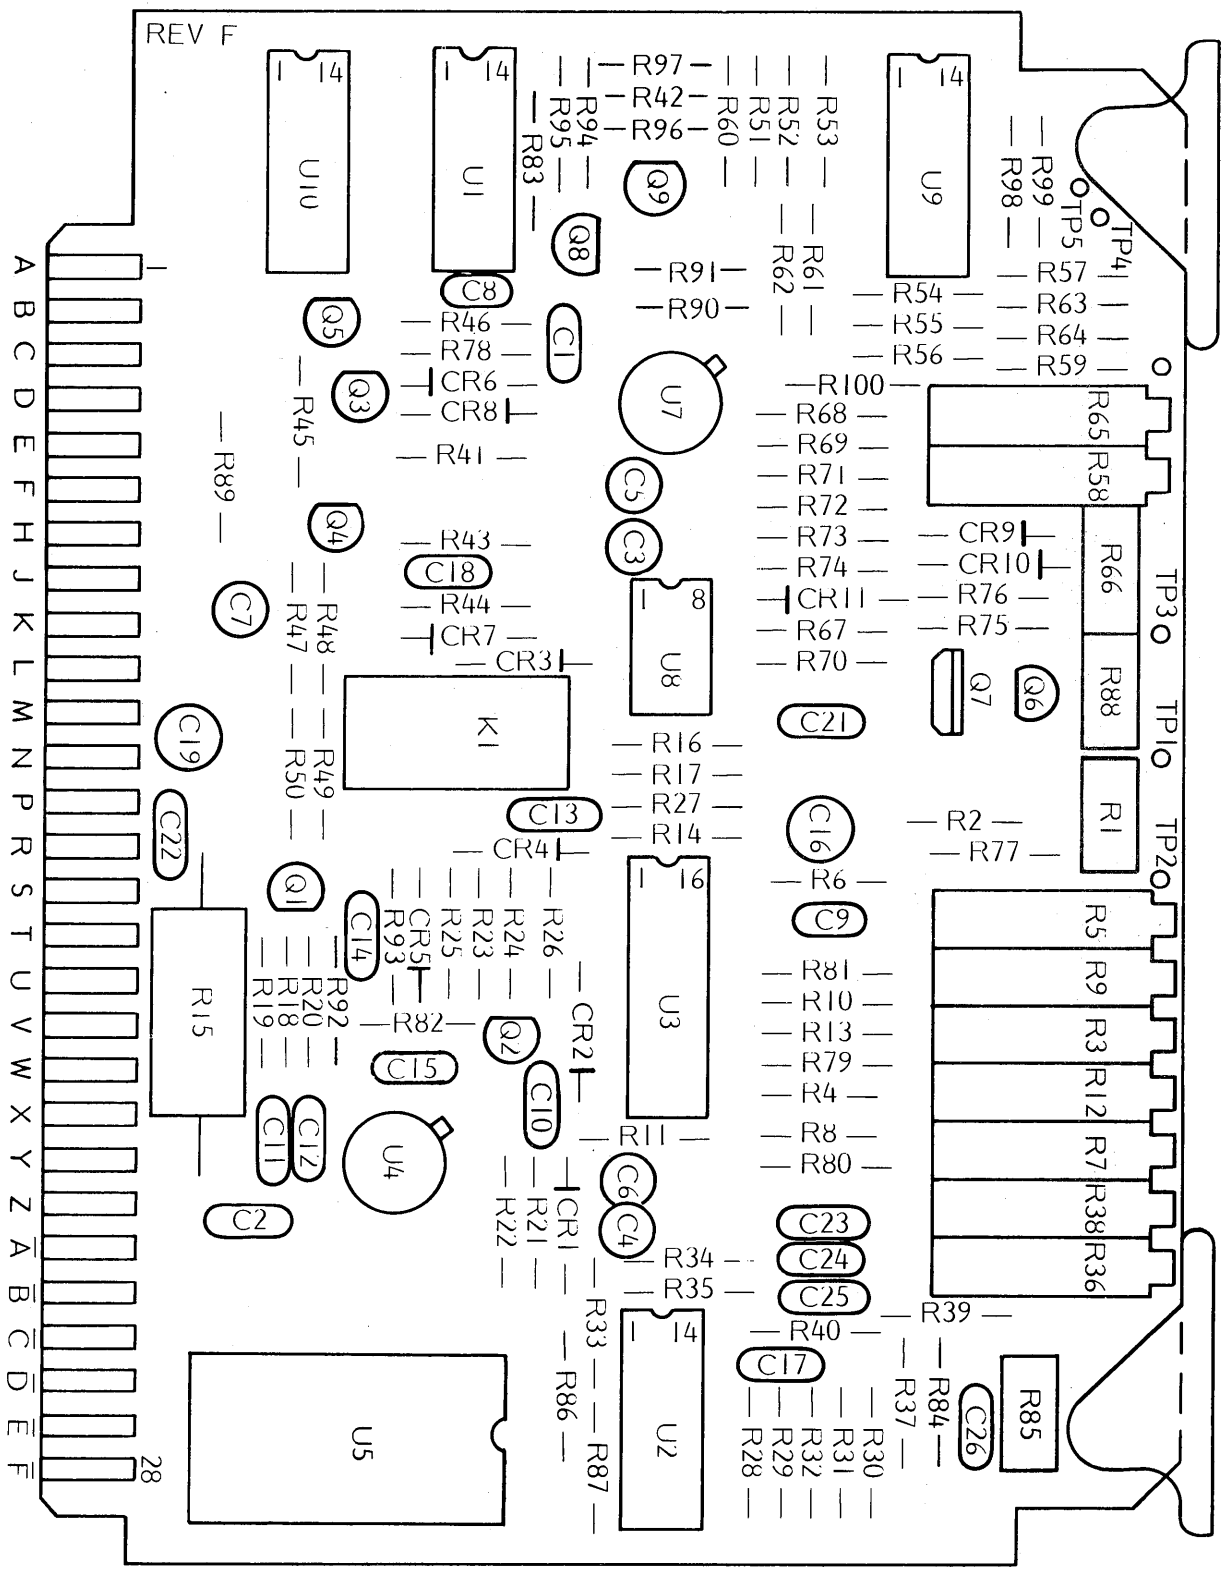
A6 Het-YIG Driver PCB, Assy 660-D-8007-7, Schematic (Sheet 3 of 3)
